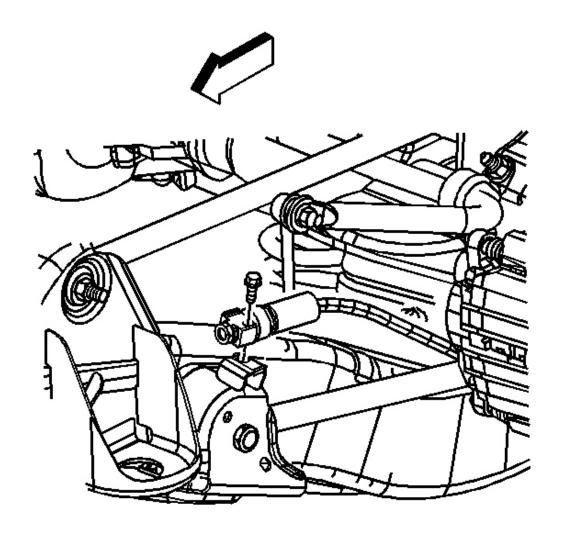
Removing/Installing Brake Line Retaining Bolt Courtesy of GENERAL MOTORS CORP.
